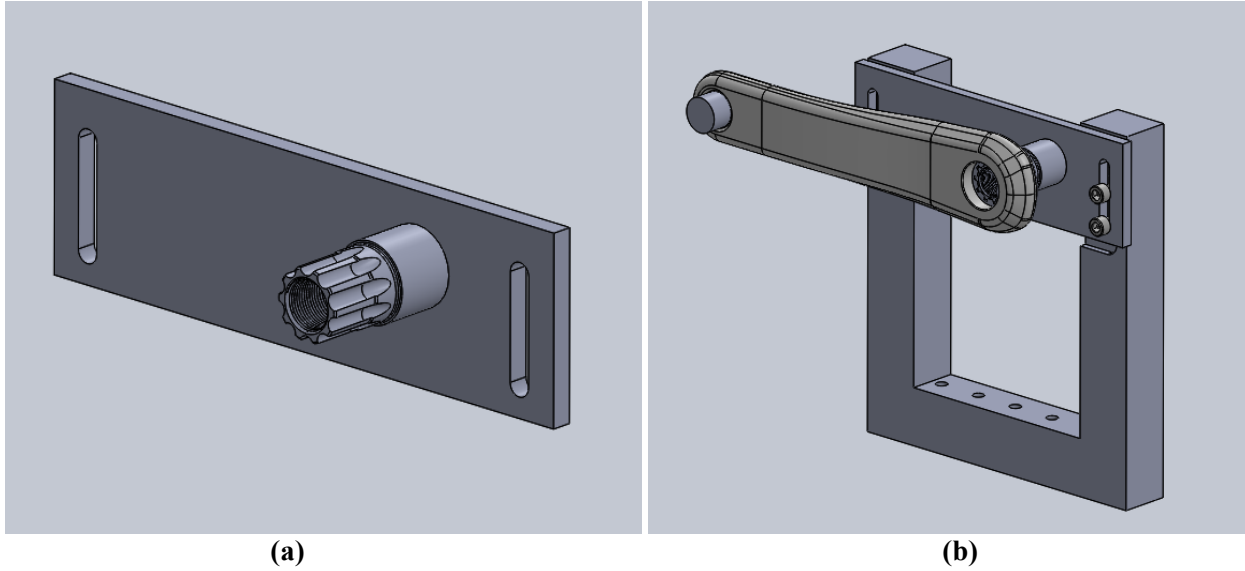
(a) Rigid spindle mount weldment. (b) Fixture concept shown using the rigid spindle mount. The pedal side of the crank arm is unsupported and an optional plug (shown) provides an additional gun interface location.
